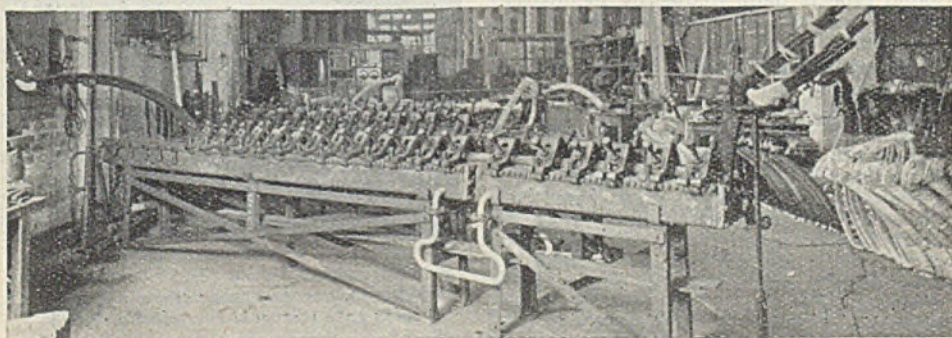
Steam-pressing turbo-alternator stator coils (General Electric Co., Ltd.)
